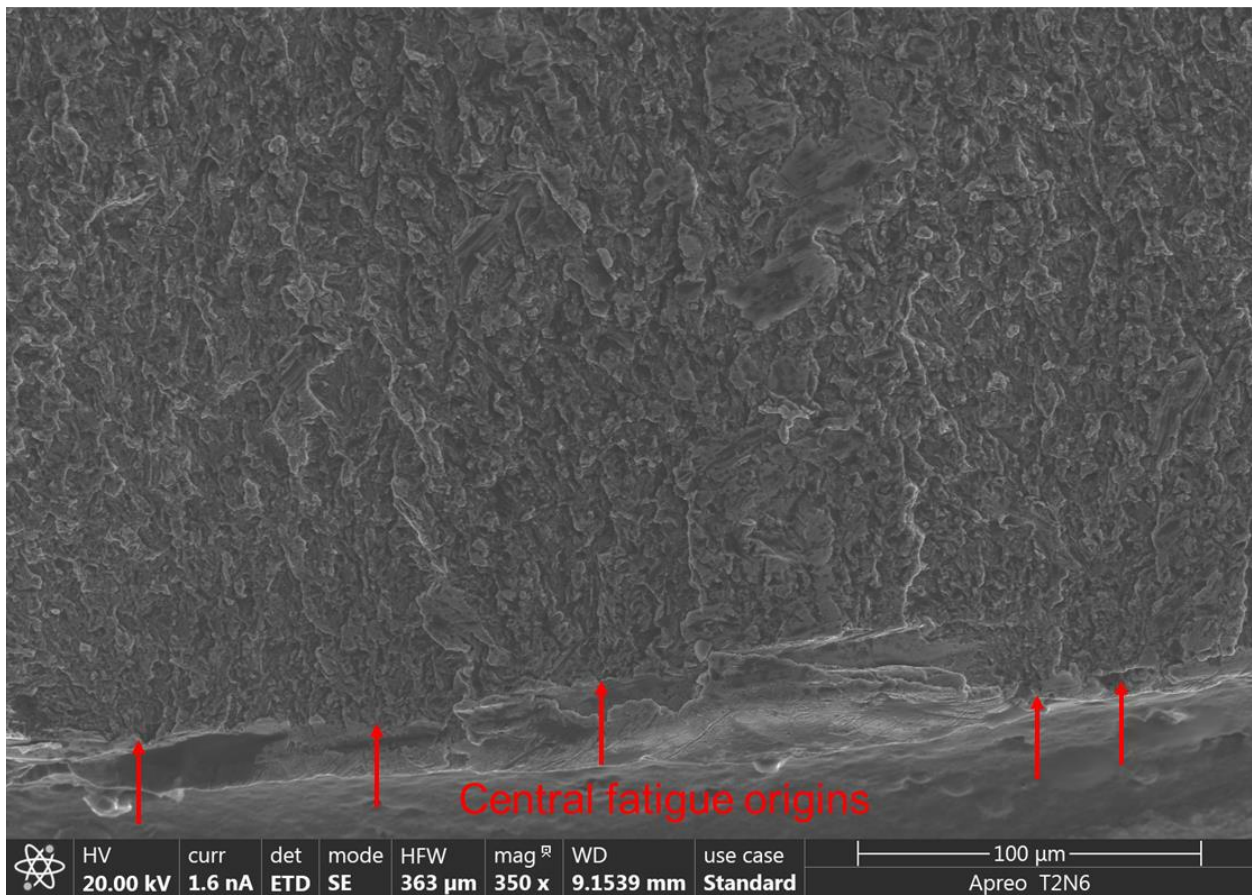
SEM image of fatigue origins at the center of the fatigue zone on the fractured bolt.
